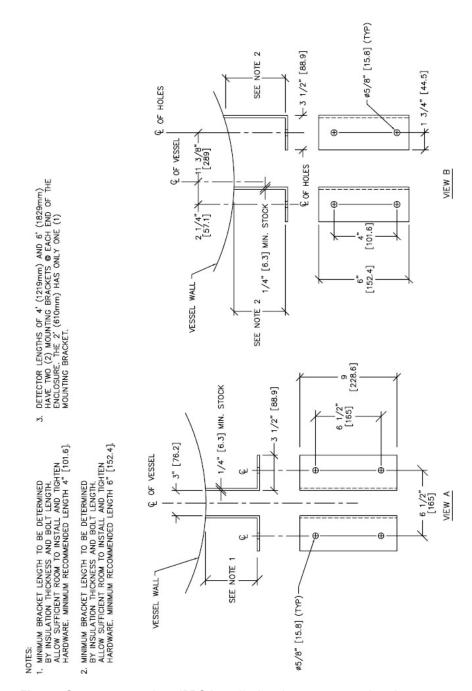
868567: LevelPRO installation / arrangement drawing -2 sources with 2 detectors (sheet 1 of 2)
